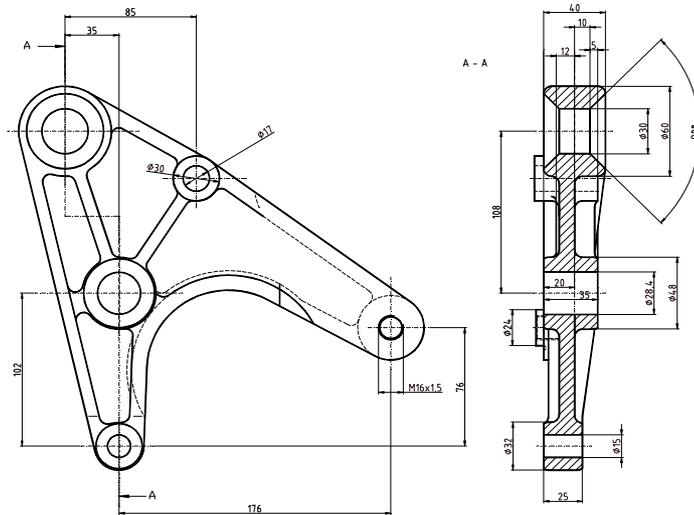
Front mounting support BM 418 (right version) MB-Nr. A 418 317 16 42
